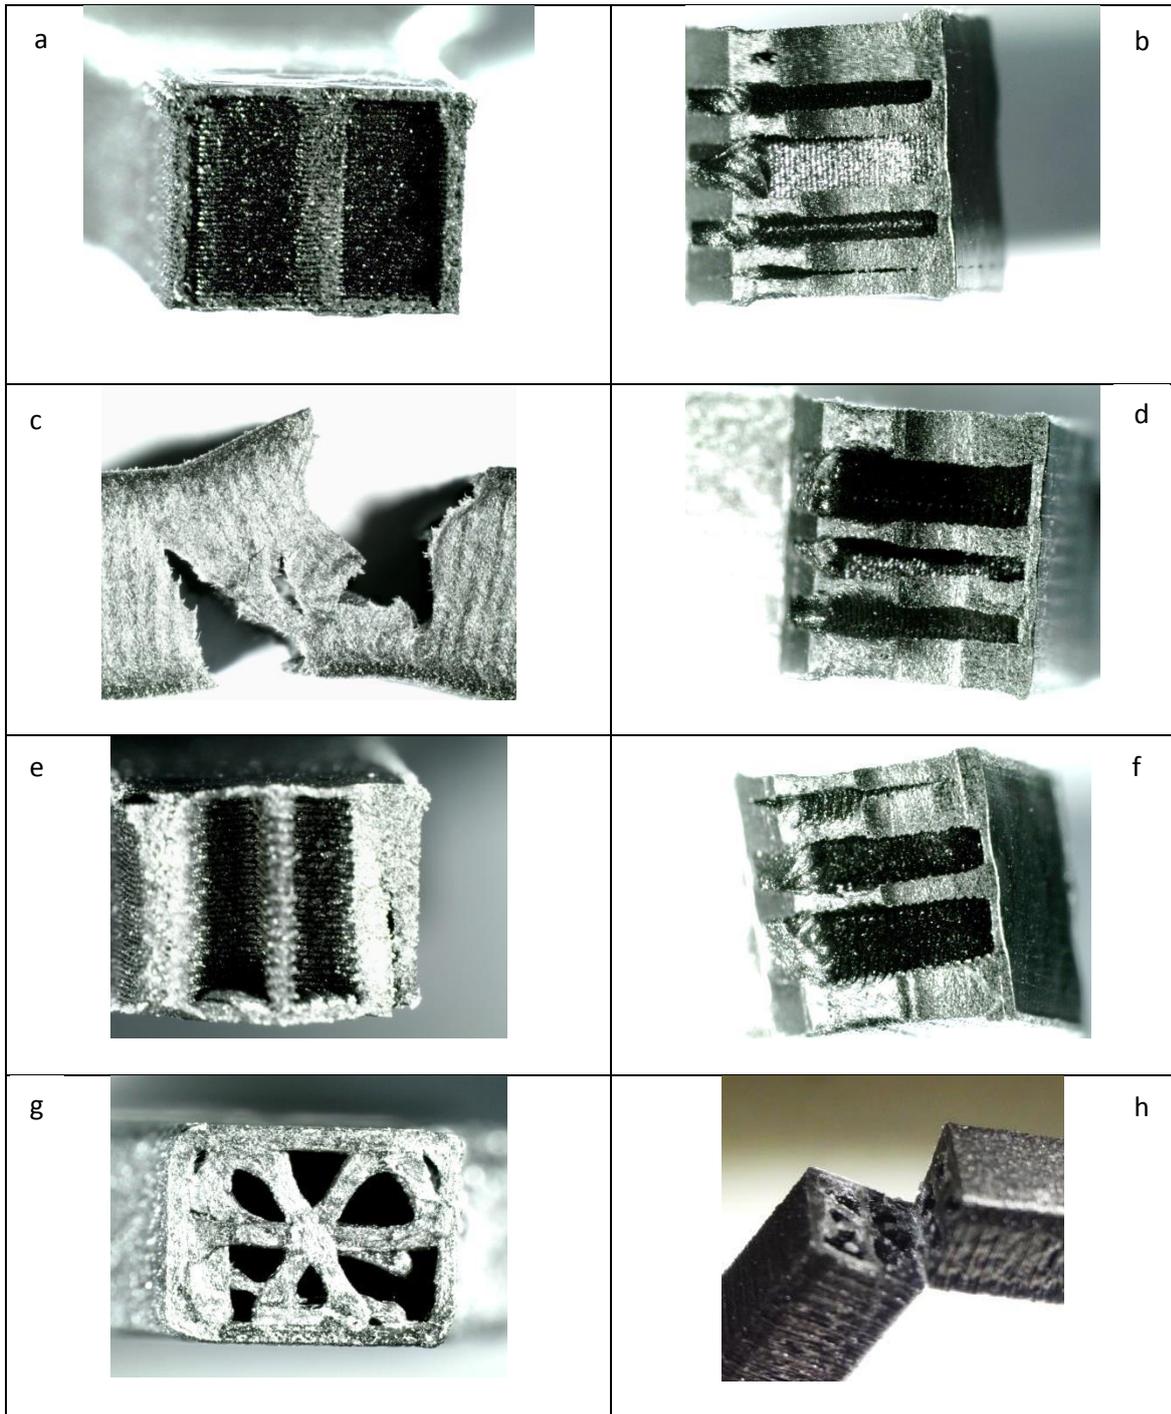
Fracture surface/internal structure of the specimen types. a) Fracture surface of test specimen EDA-OB-1-6, b) cross-section of test specimen EDA-OB-1-5, c) side view of fracture of EDA-OB-2-2, d) cross-section of test specimen EDA-OB-2-3, e) fracture surface of EDA-OB-3-5, f) cross-section of test specimen EDA-OB-3-1, g) fracture surface of test specimen EDA-OB-4-6, h) cross-section of test specimen EDA-OB-4-4.
